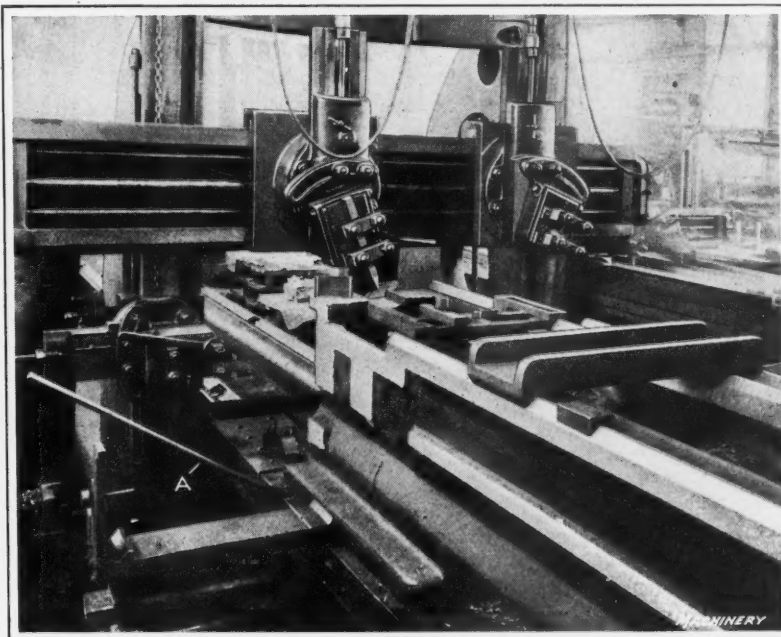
Close-up View of a Large Lathe Bed that is being planed, showing Method of setting up and Gages for testing Finished Work
